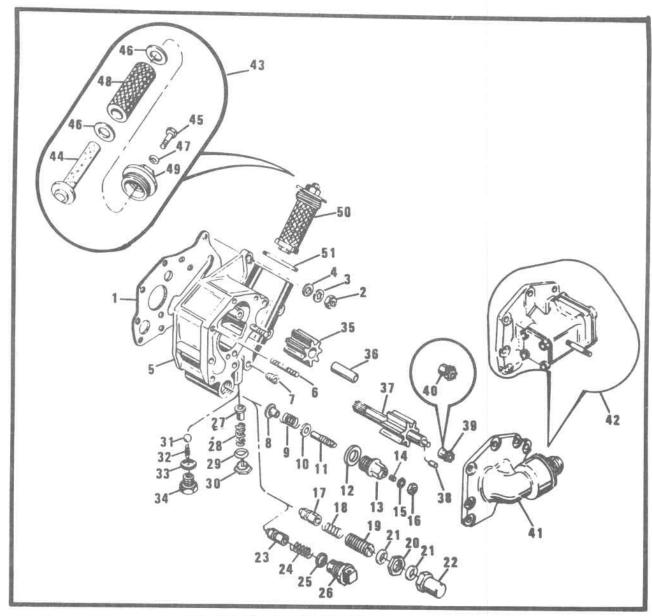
A. OIL PUMP ASSEMBLY.
